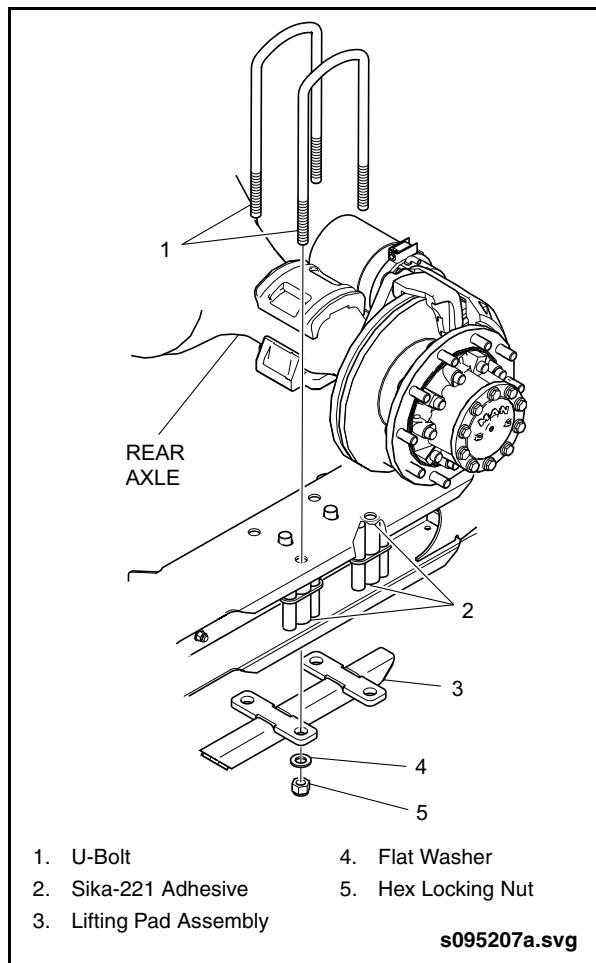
Axle to Suspension Beam Mounting Detail
